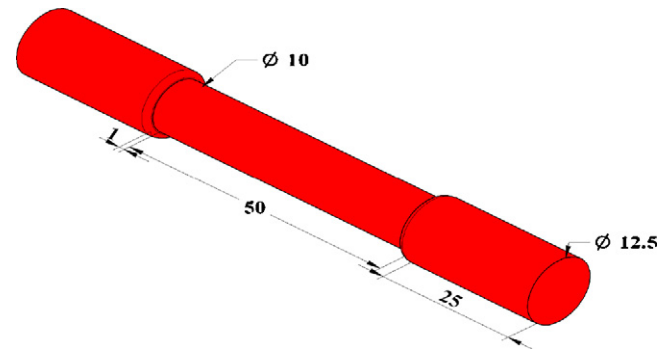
A tensile test specimen (10 mm × 50 mm gauge length).
